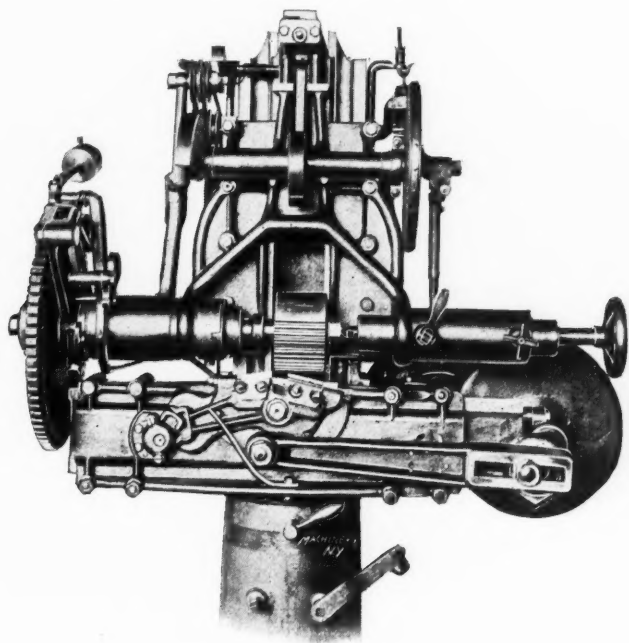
The Pederson Formed Tool Gear Shaping Machine.
